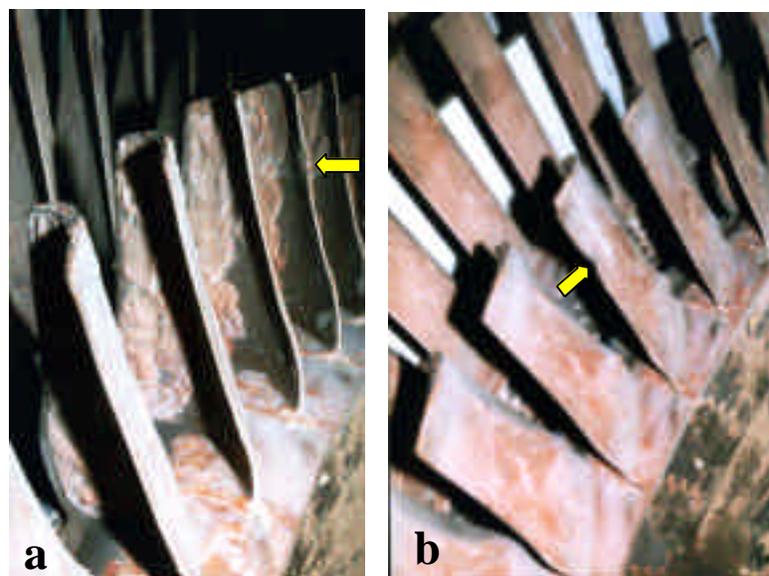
Uncooled low-pressure turbine blades showing (a) heavy deposits on the pressure surfaces (b) view of the suction side distortion as well as impact damage (arrows)
